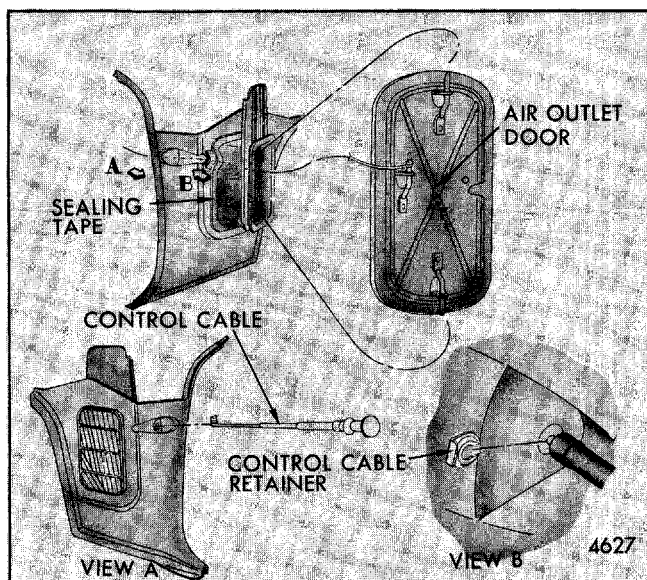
Shroud Side Duct Air Outlet and Door
